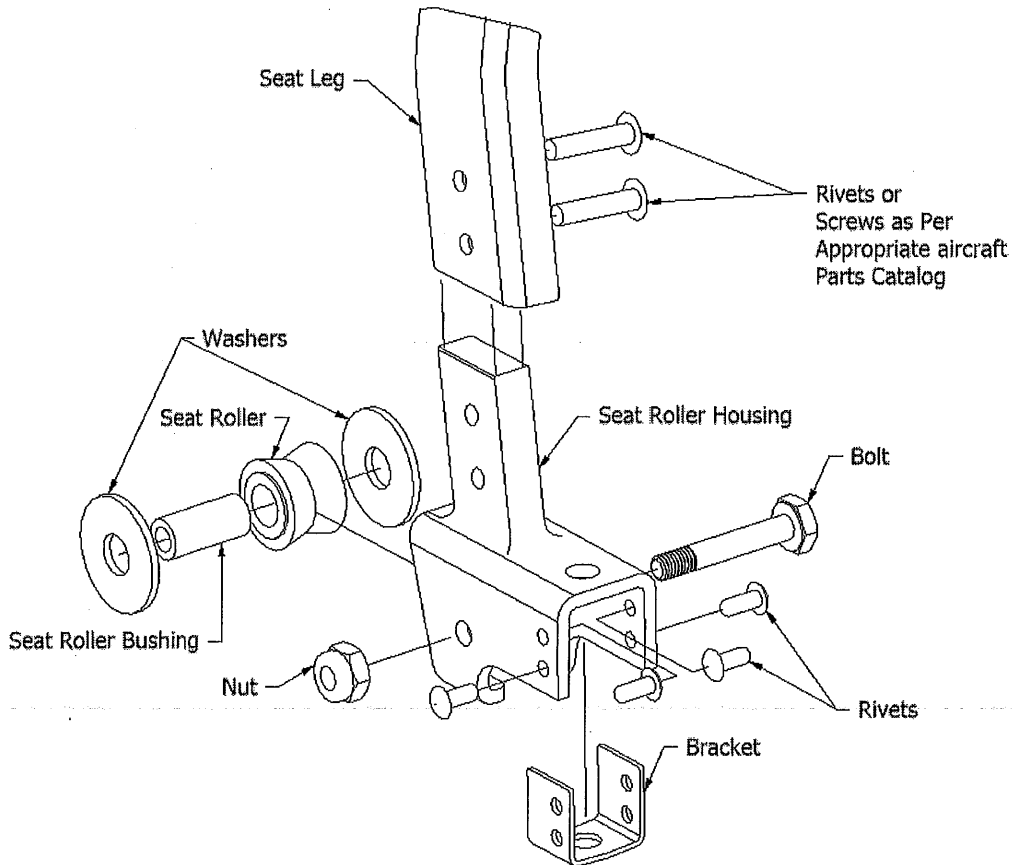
Typical extruded aluminum type seat roller housing/seat leg assembly.
